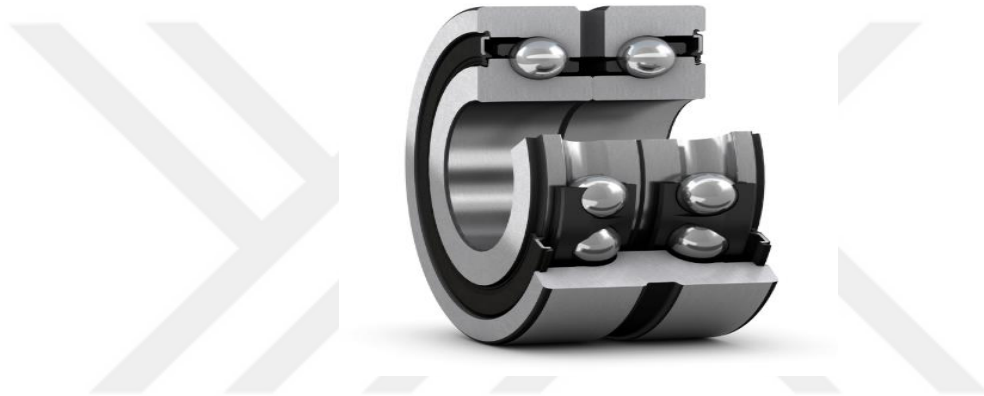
Double Direction Thrust Ball Bearings (SKF, 2017)
